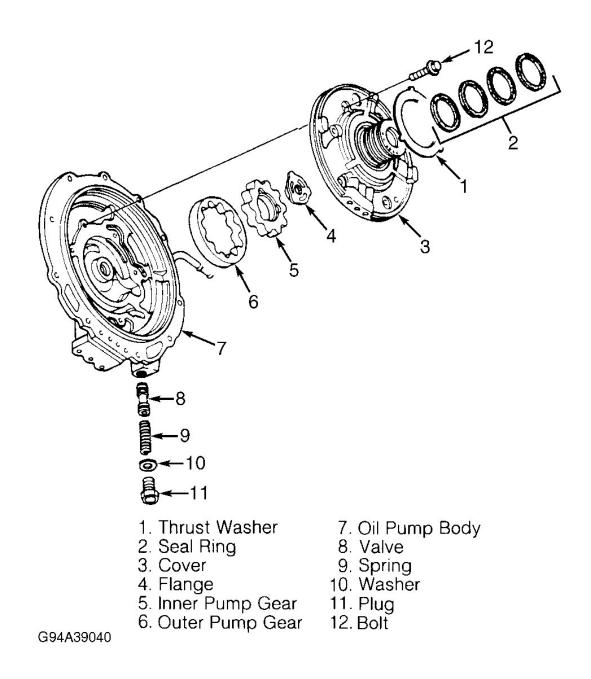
Exploded View Of Oil Pump Courtesy of FORD MOTOR CO.
